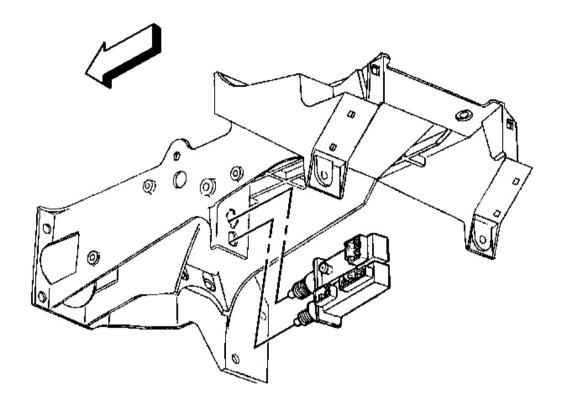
Stop Lamp Switch Courtesy of GENERAL MOTORS CORP.
